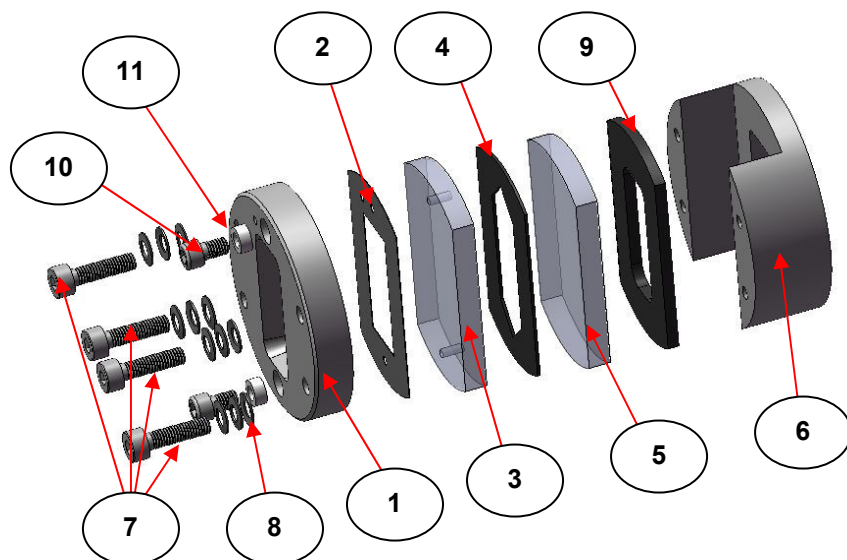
“Exploded” View of GS20500 and GS20510 Liquid Sample Cells for Their Components
